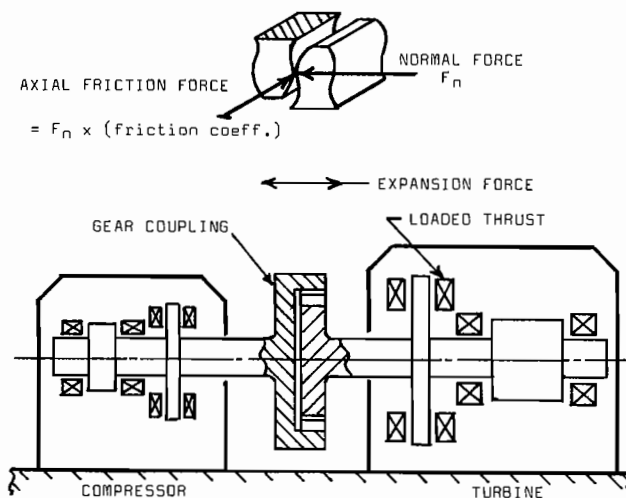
Schematic Sketch of a Steam Turbine Driving a Compressor Using a Gear Type Coupling.
